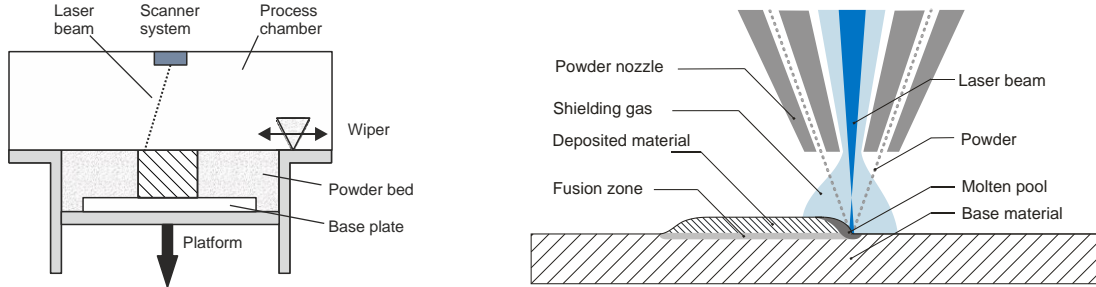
(a) Selective laser melting process; (b) Laser metal deposition process
